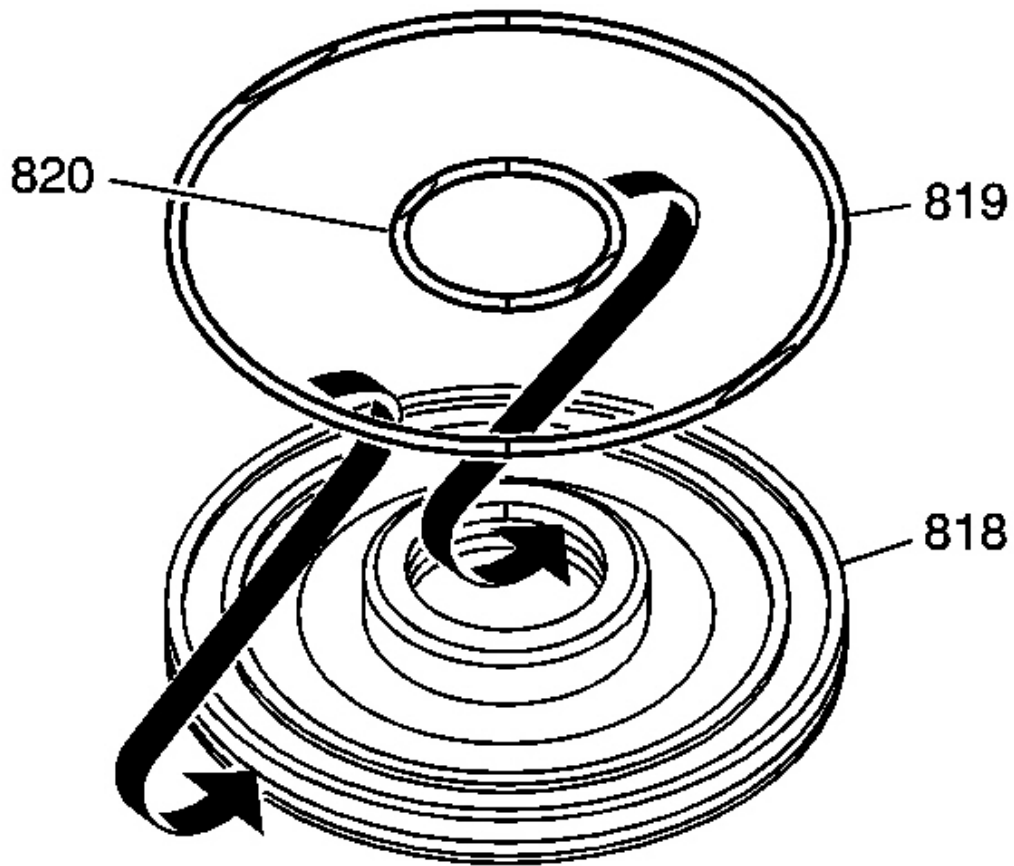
3rd Clutch Piston & Outer/Inner O-Ring Seal Removed
